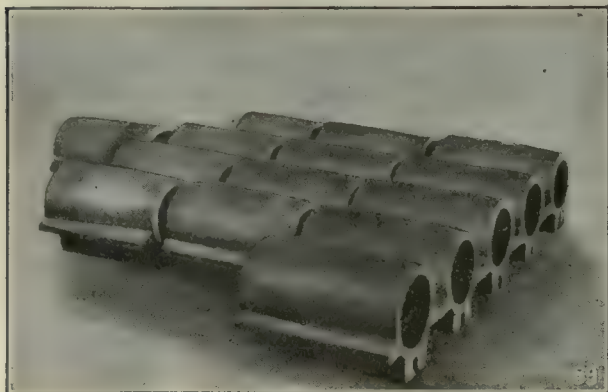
THE ROUGHLY MACHINED LOCKING-HOOP FORGINGS
